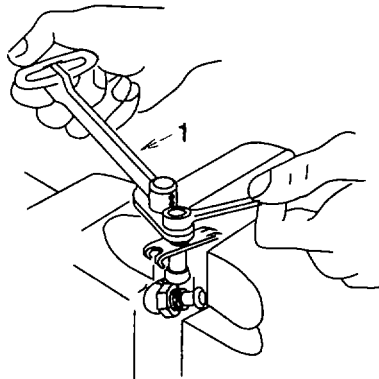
Nozzle Pressure Adjusting Lock Nut Torque
